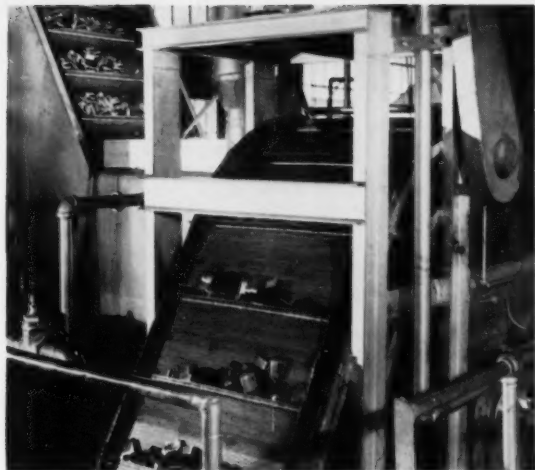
This conveyor belt is elevating the springs out of the quenching oil and dropping them into a washer where the oil is removed by a bath of hot water containing a detergent. In the rear is seen another conveyor belt taking the springs to the drawing furnace (see also left foreground in Fig. 1).
